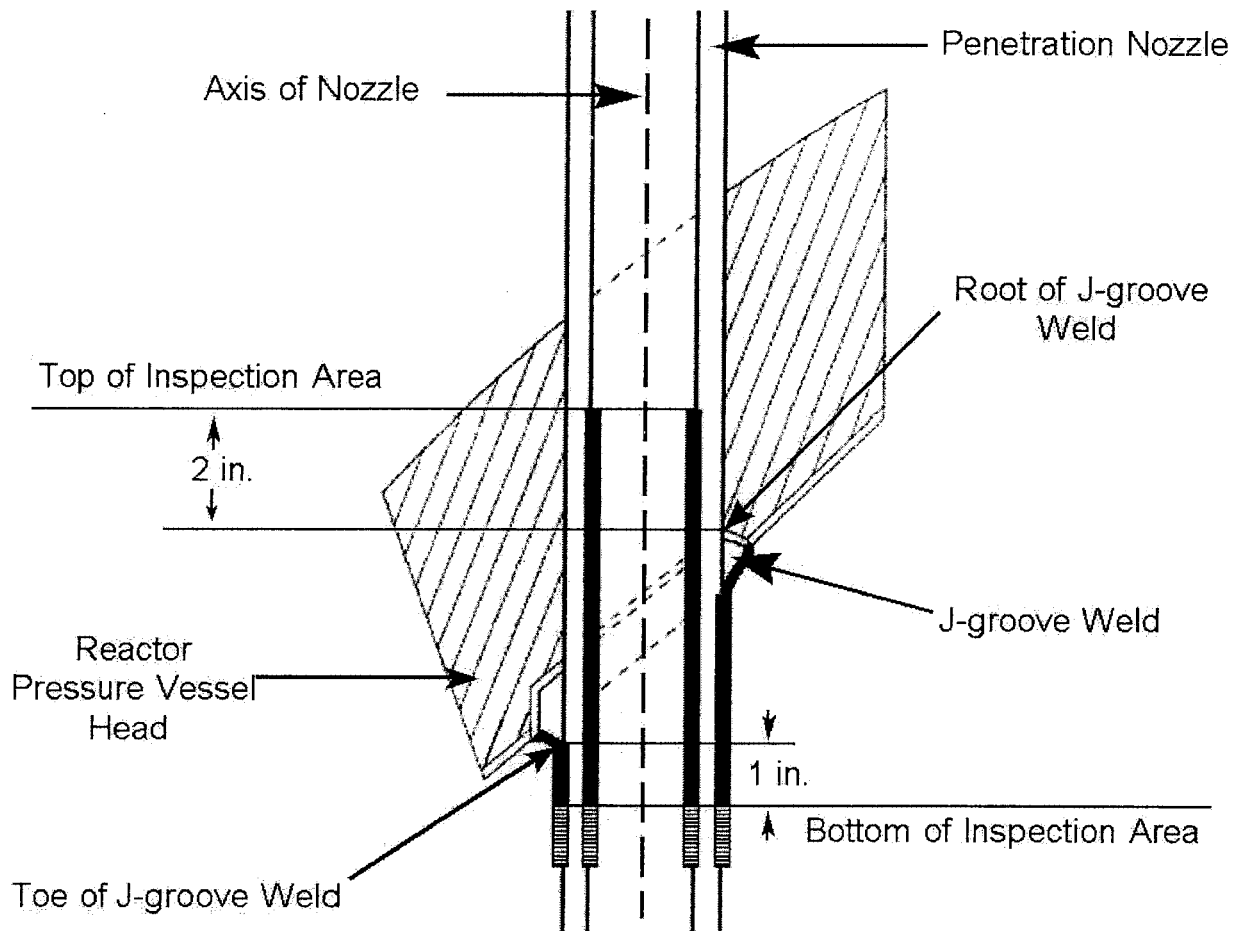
Required Wetted Surface Inspection Area With Stress Analysis (The penetration nozzle and J-groove weld surface areas in black require surface inspection. Nozzle area in grey requires surface inspection only if applied stress is ≥ 20 ksi in that specific area.)
